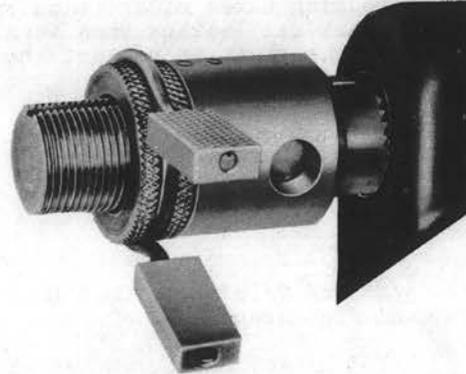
Position of No. 590A Oil Closure Cutter Before Start of Cut
